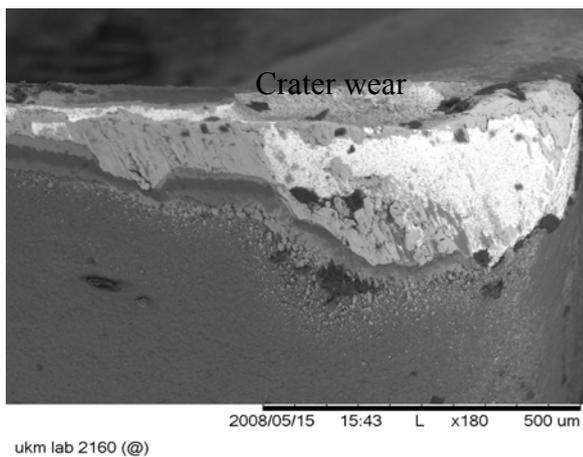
Crater wear on the rake face when machining at cutting speed of 210 m/min, feed rate of 0.4 mm/tooth and depth of cut of 0.3 mm
